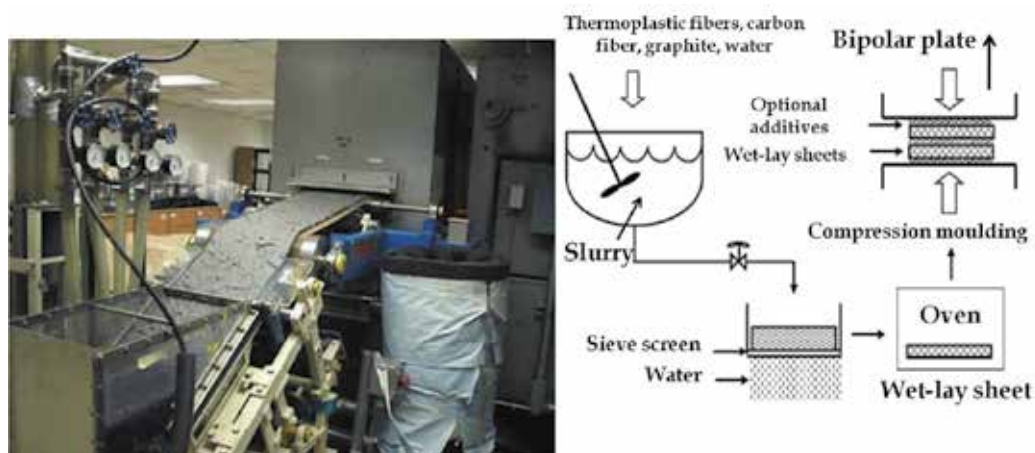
Manufacture of wet-lay composite sheets and bipolar plates [54]
